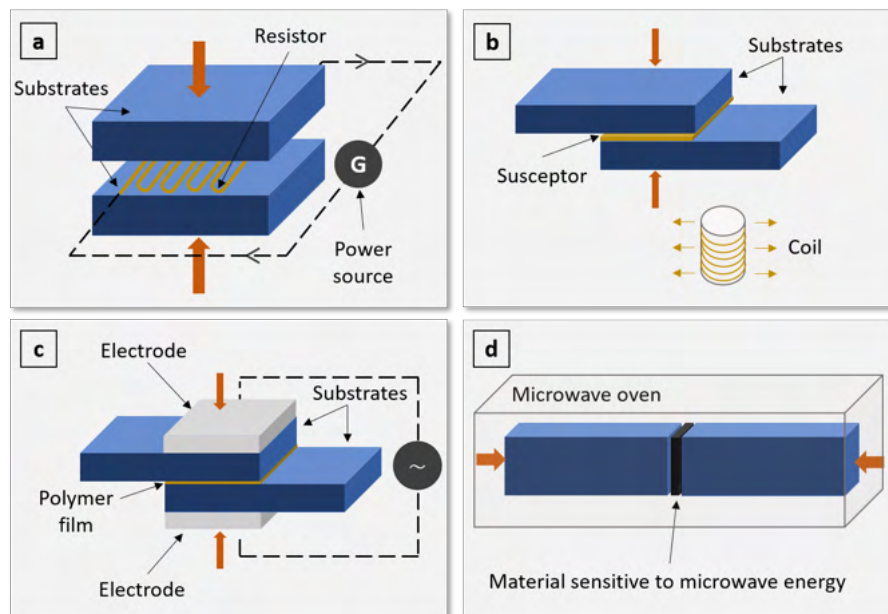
Illustration of electromagnetic welding processes: resistance welding (a), induction welding (b), dielectric welding (c) and microwave welding (d)
